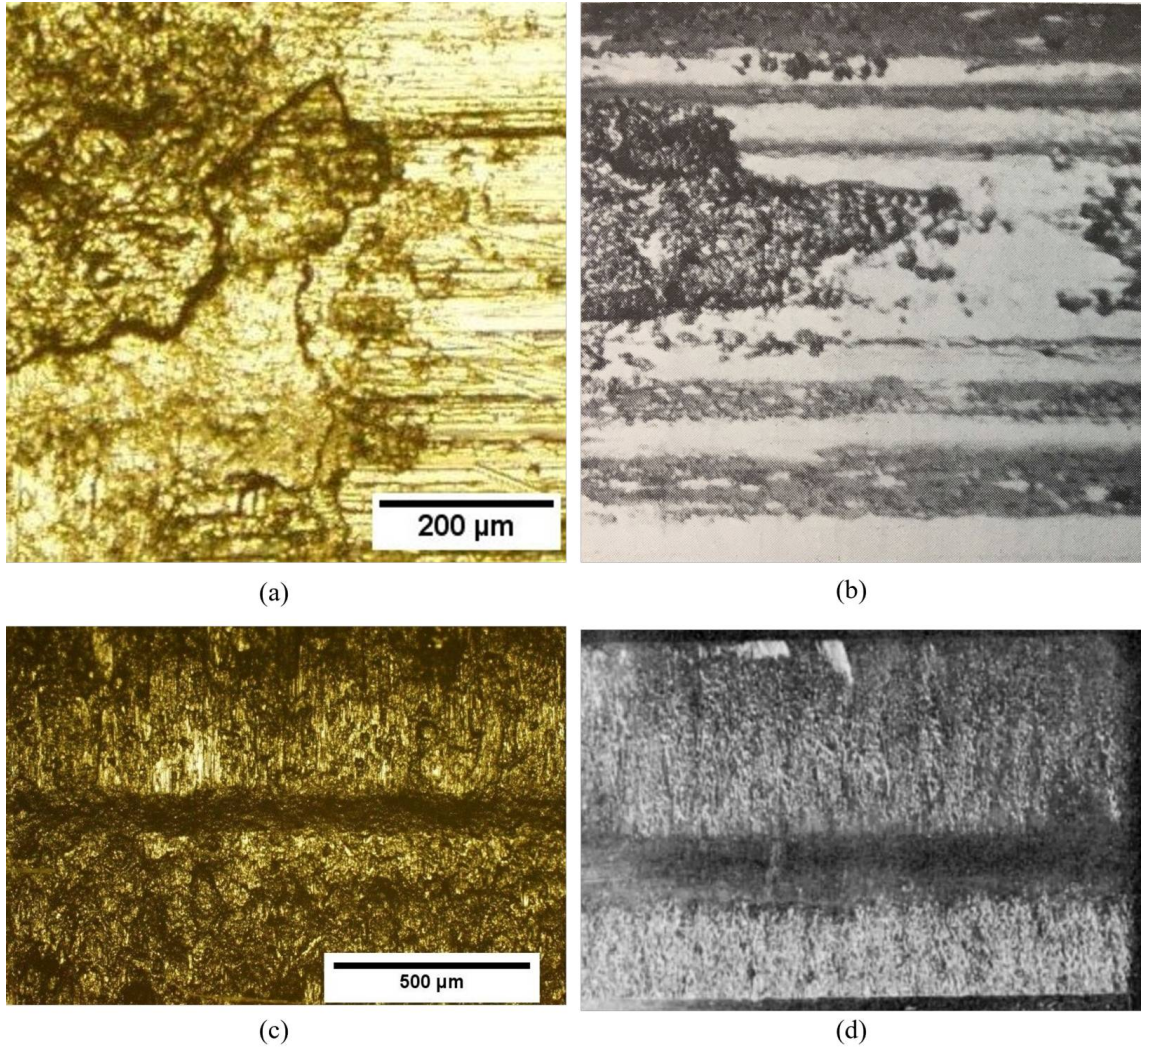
(a) A mould image of a moderate-scuffed gear surface in the dry test, (b) the reference in [232], (c) a mould image of a severe-scuffed gear surface in the dry test, (d) the reference in [29].
